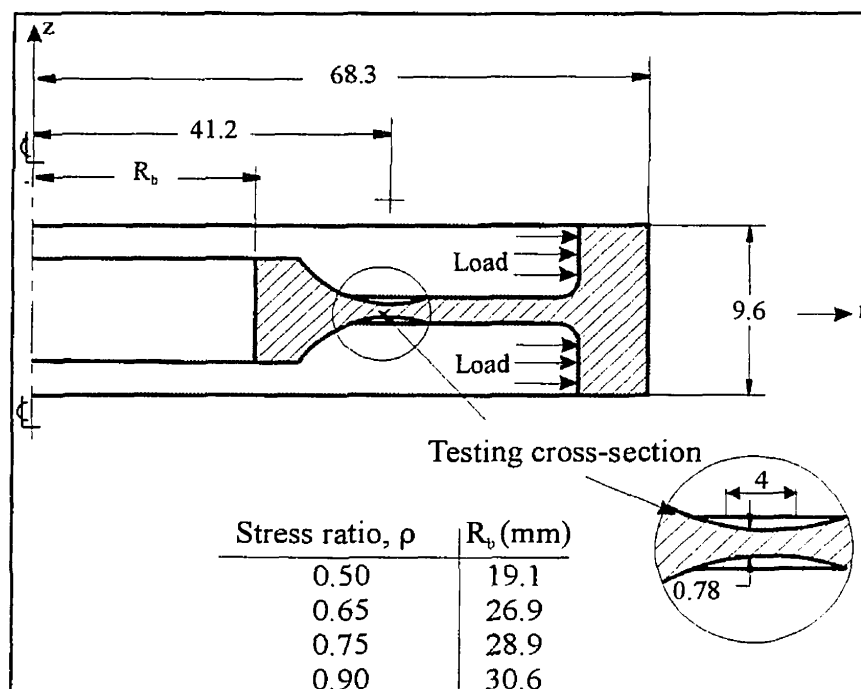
Geometry of a typical disk specimen (dimensions in mm)
